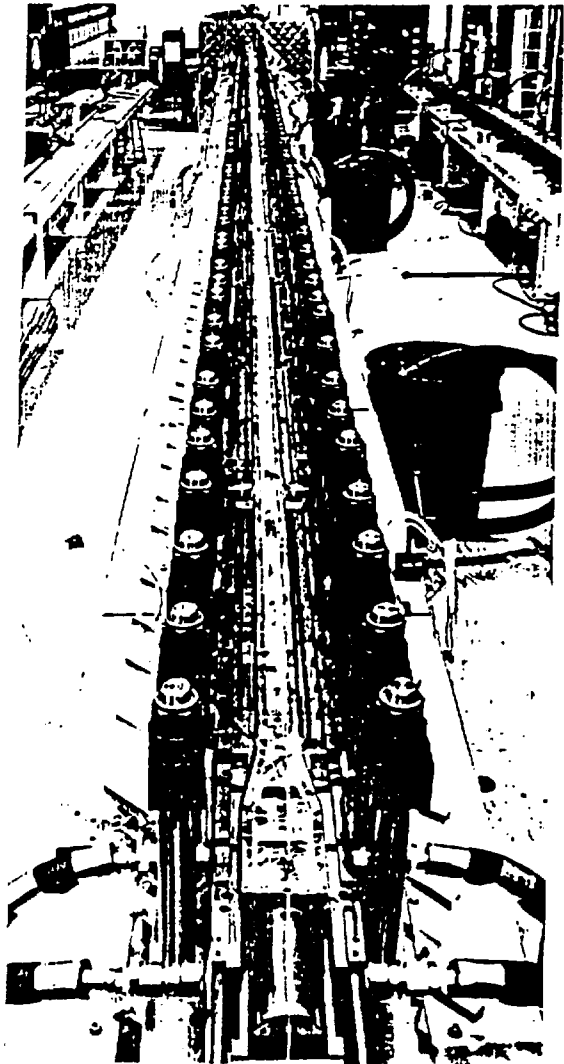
Oil-heated coil curing fixture, assembled from eleven 1.5 m module sections.
